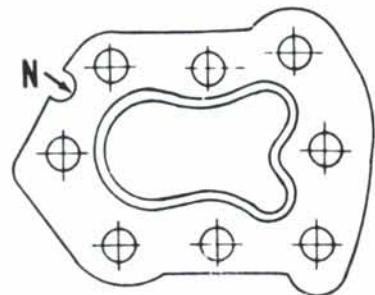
Install head gasket on MF180 models so notch (N) is towards flywheel side of engine.
